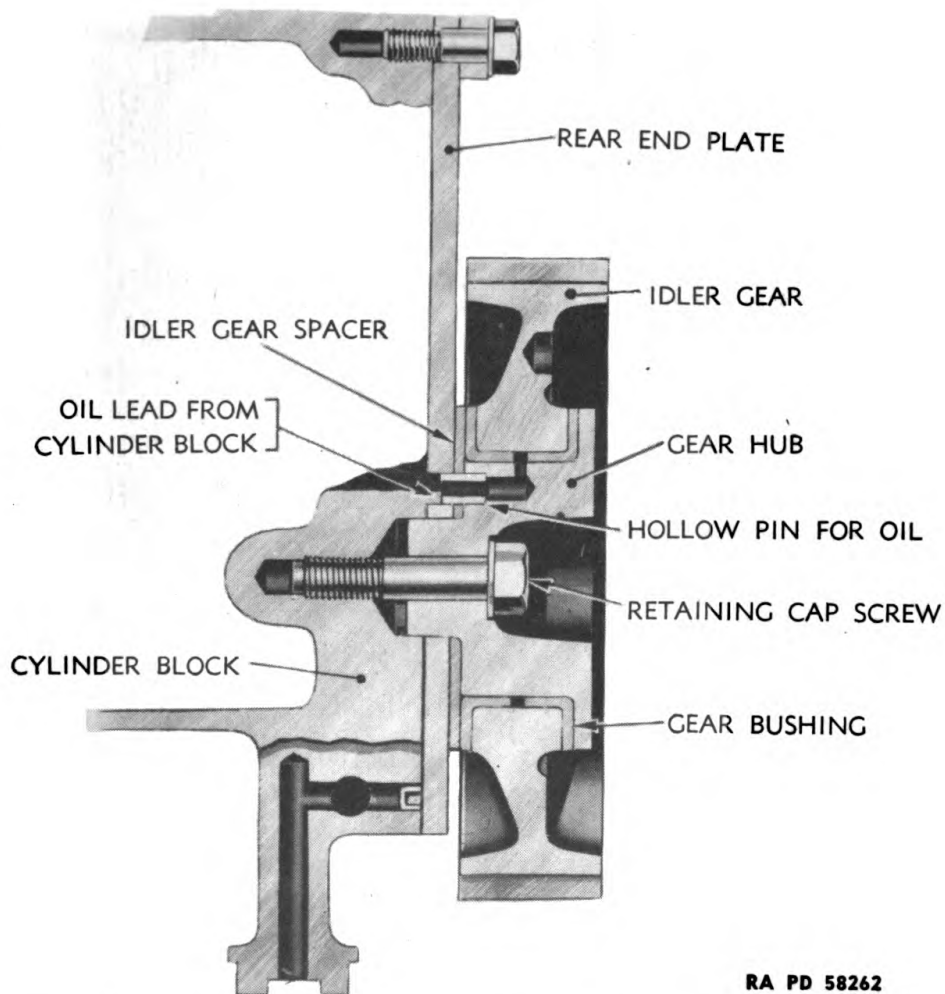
Relative Position of Parts in Idler Gear Assembly
